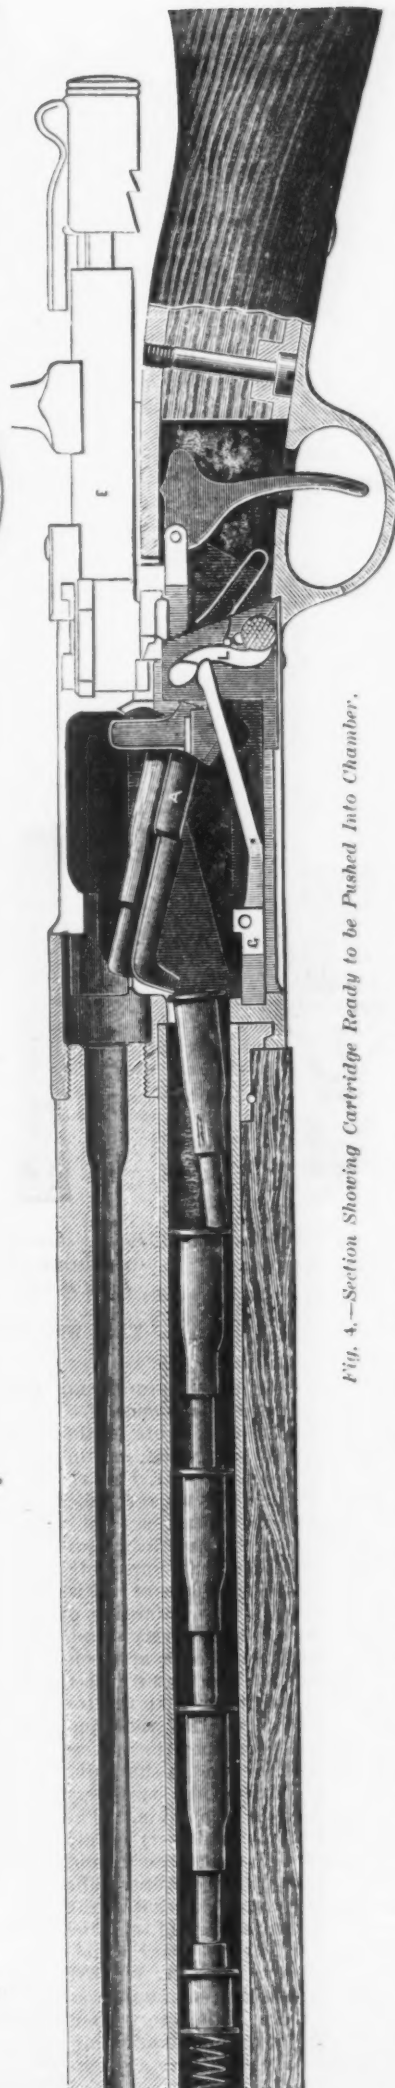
Section Showing Cartridge Ready to be Pushed Into Chamber.
